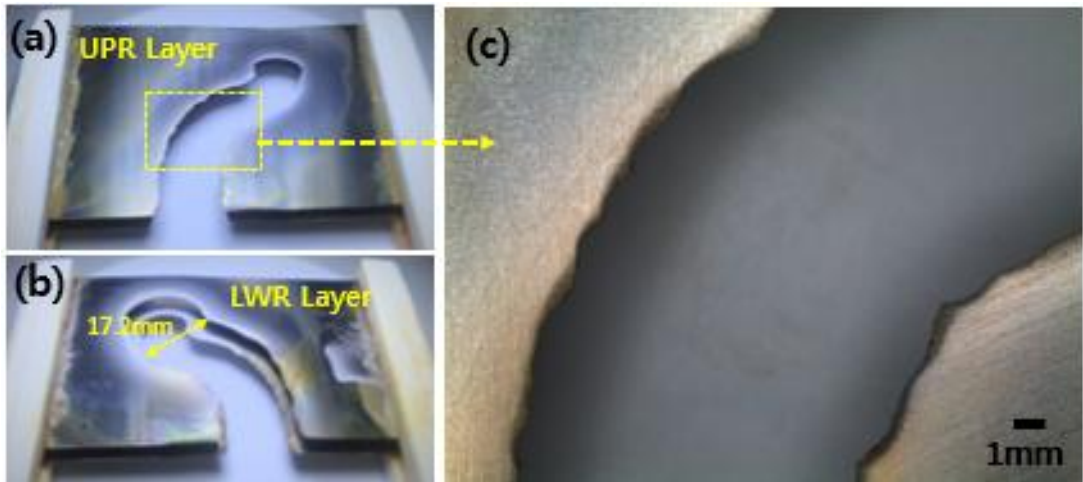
Workpiece after 2-axis ECM using cylindrical electrode on STS 304 0.3T double layers
